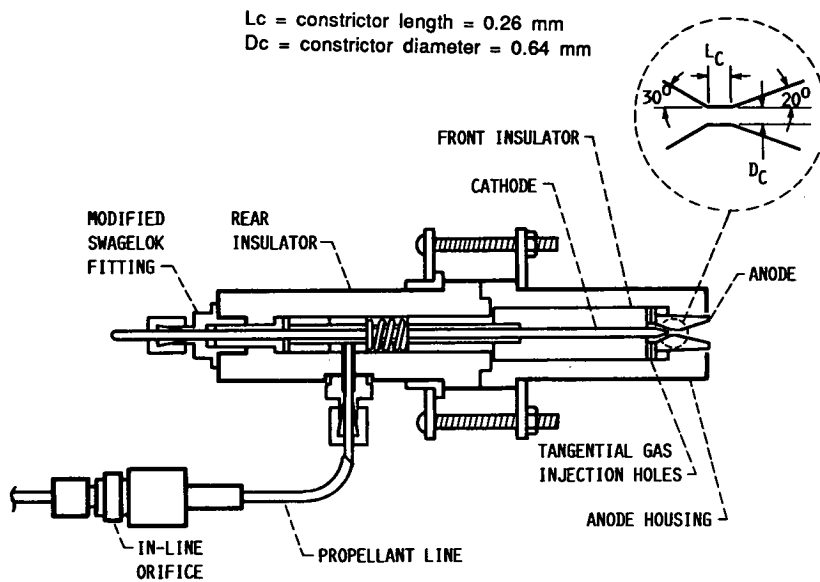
Cutaway view of arcjet thruster with typical dimensions.
